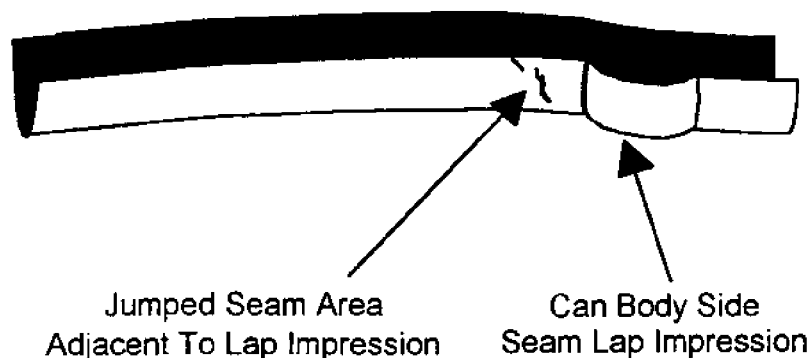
View of coverhook at the crossover (lap) of soldered can.
